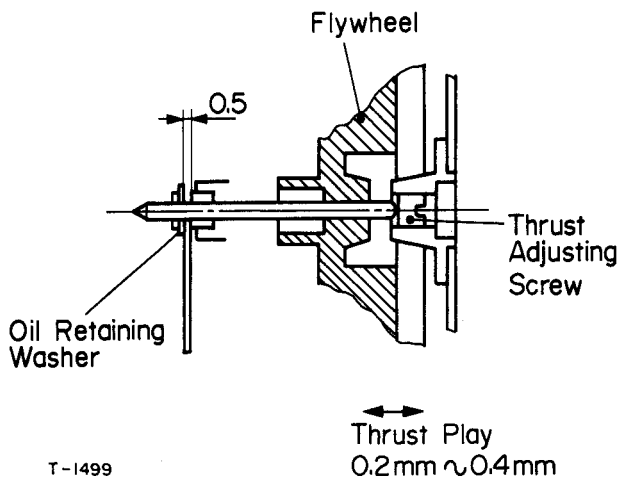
Capstan Ass'y Thrust Adjustment
